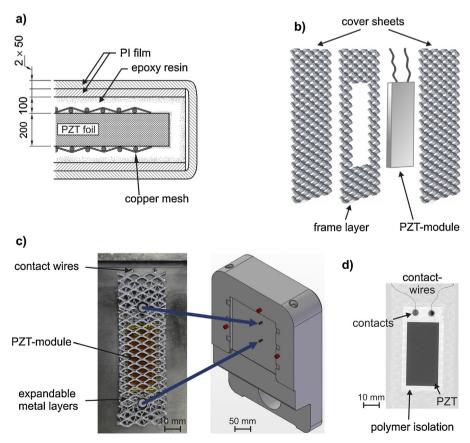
(a) Schematic illustration of PZT-module [10]. (b) Basic design of insert including the PZT-module. (c) Positioning of insert in casting mold. (d) Radiography of casting with PZT-module.
